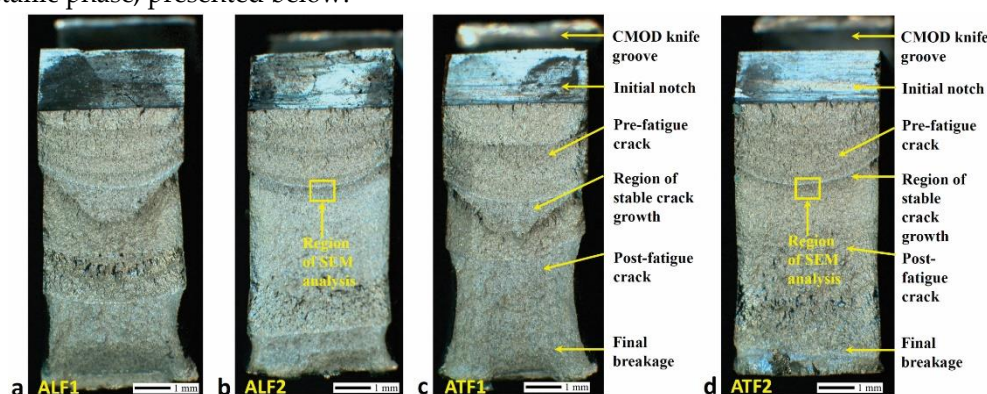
Fractured toughness specimen surfaces with fractographic detail – macro pictures: a) Specimen ALF1; b) Specimen ALF2; c) Specimen ATF1; d) Specimen ATF2.
